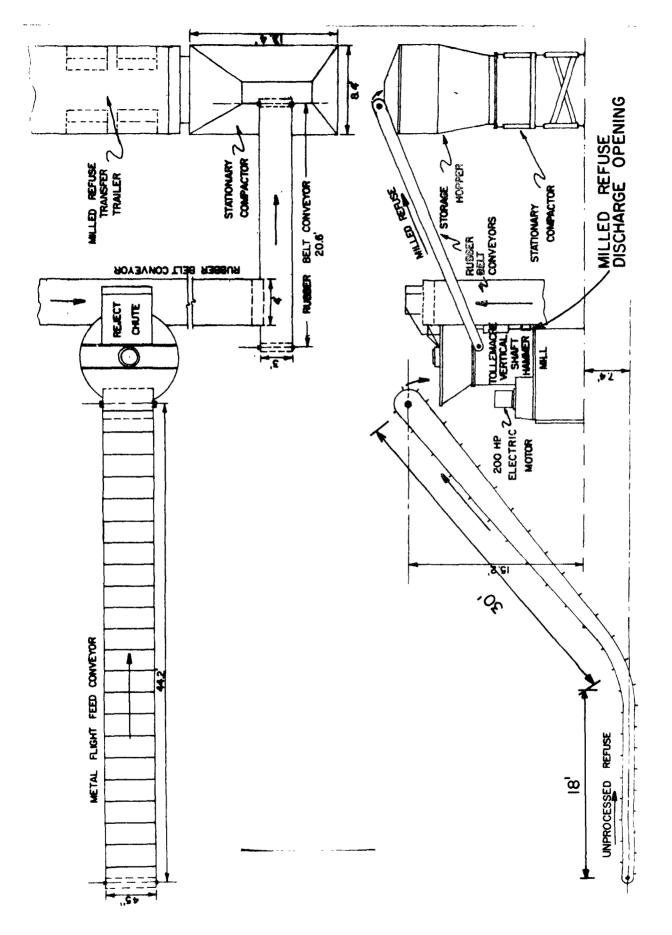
Overhead and Side views feed and take-away conveyors of Tollemache System.
